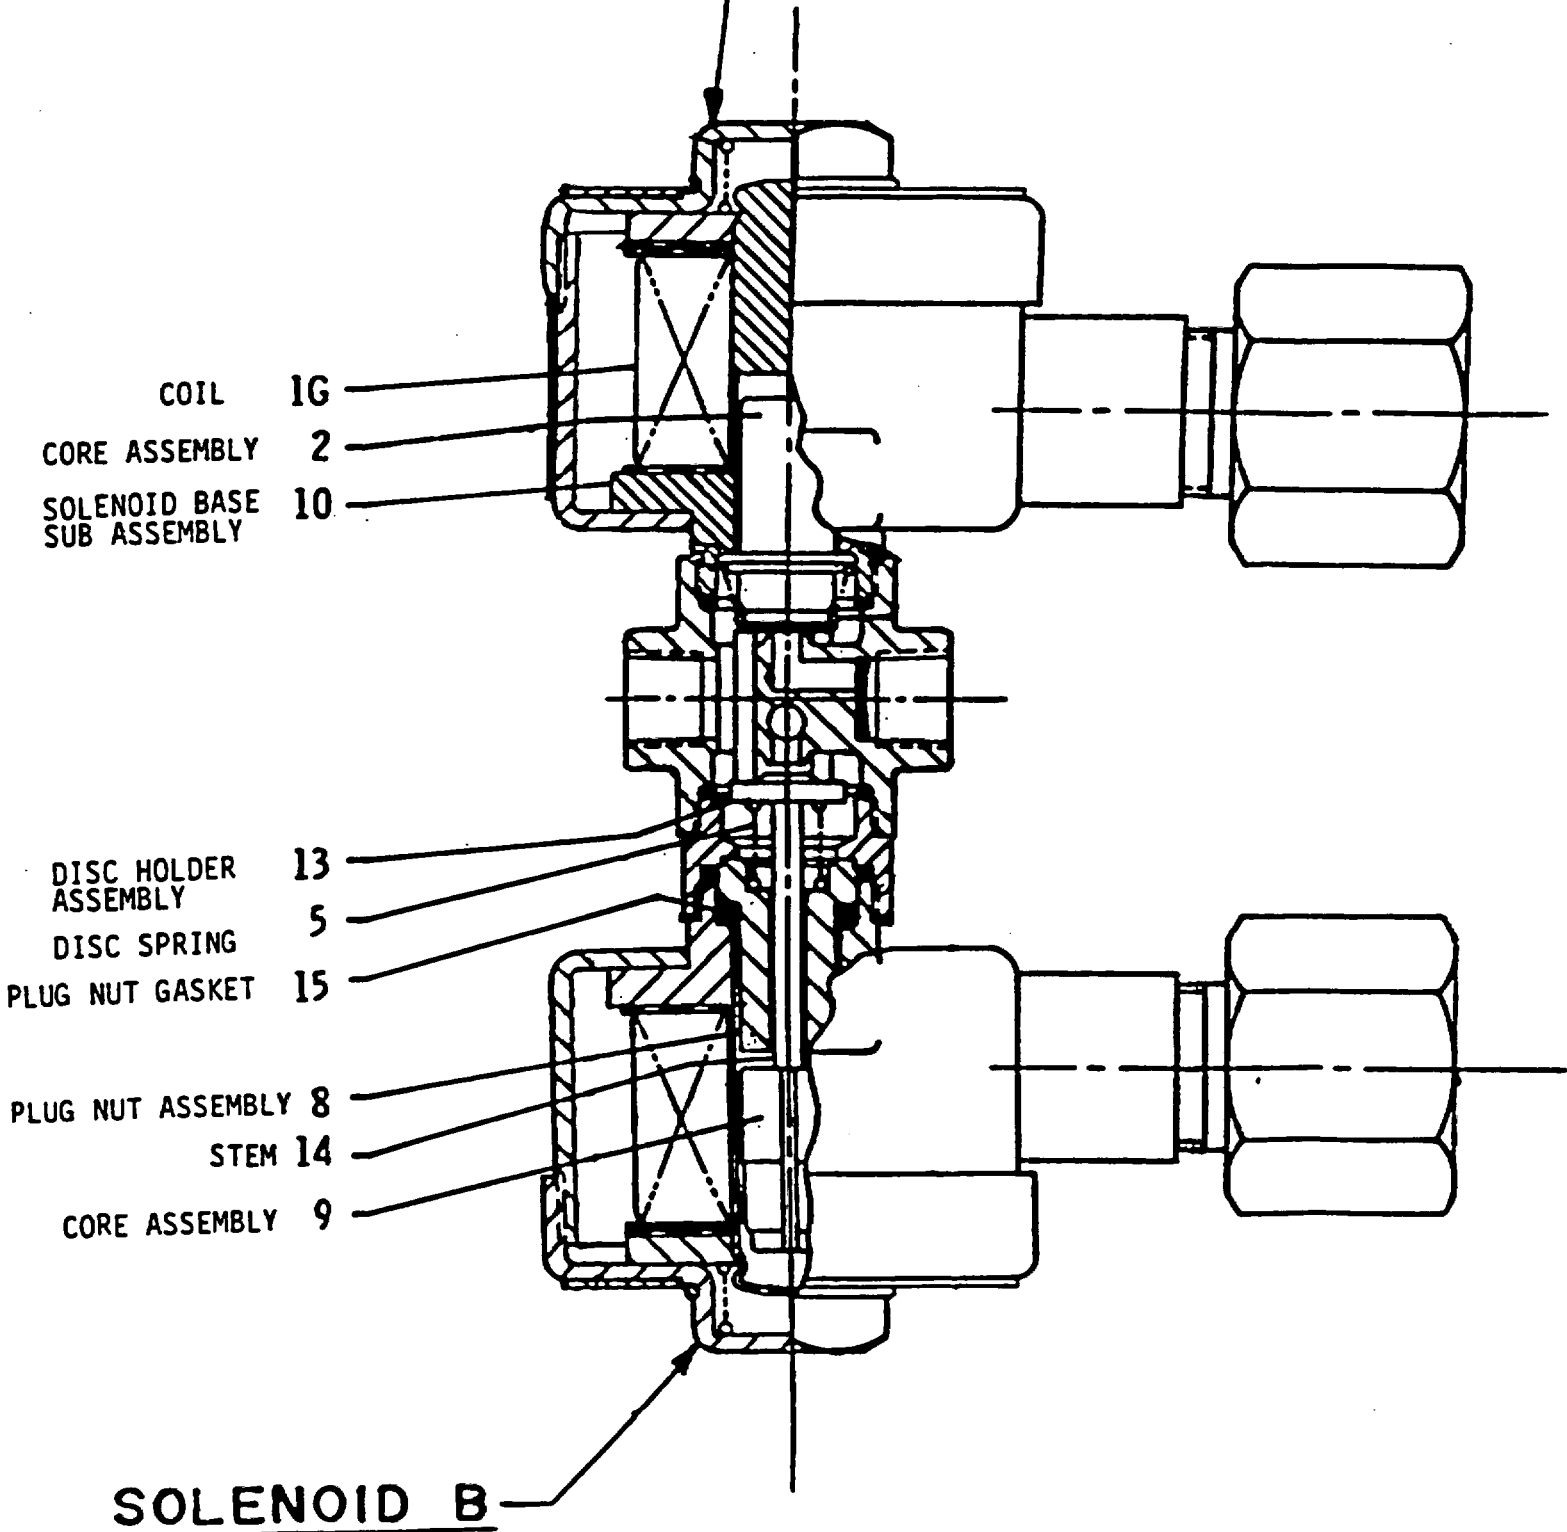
ASCO NP8323 3-Way Pilot Solenoid Valve
